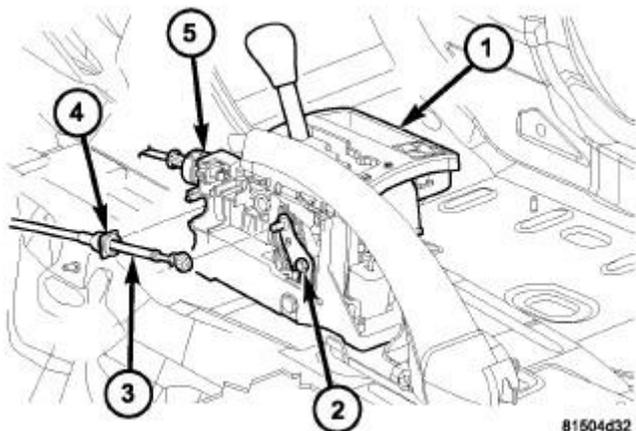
Identifying Gearshift & Park Lock Cable At Shifter Assembly
